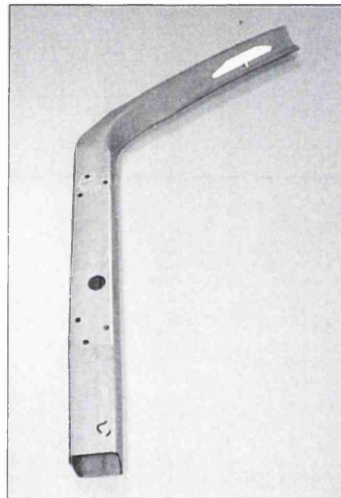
Hydroformed A-pillar prototype component produced from ERW steel tube
